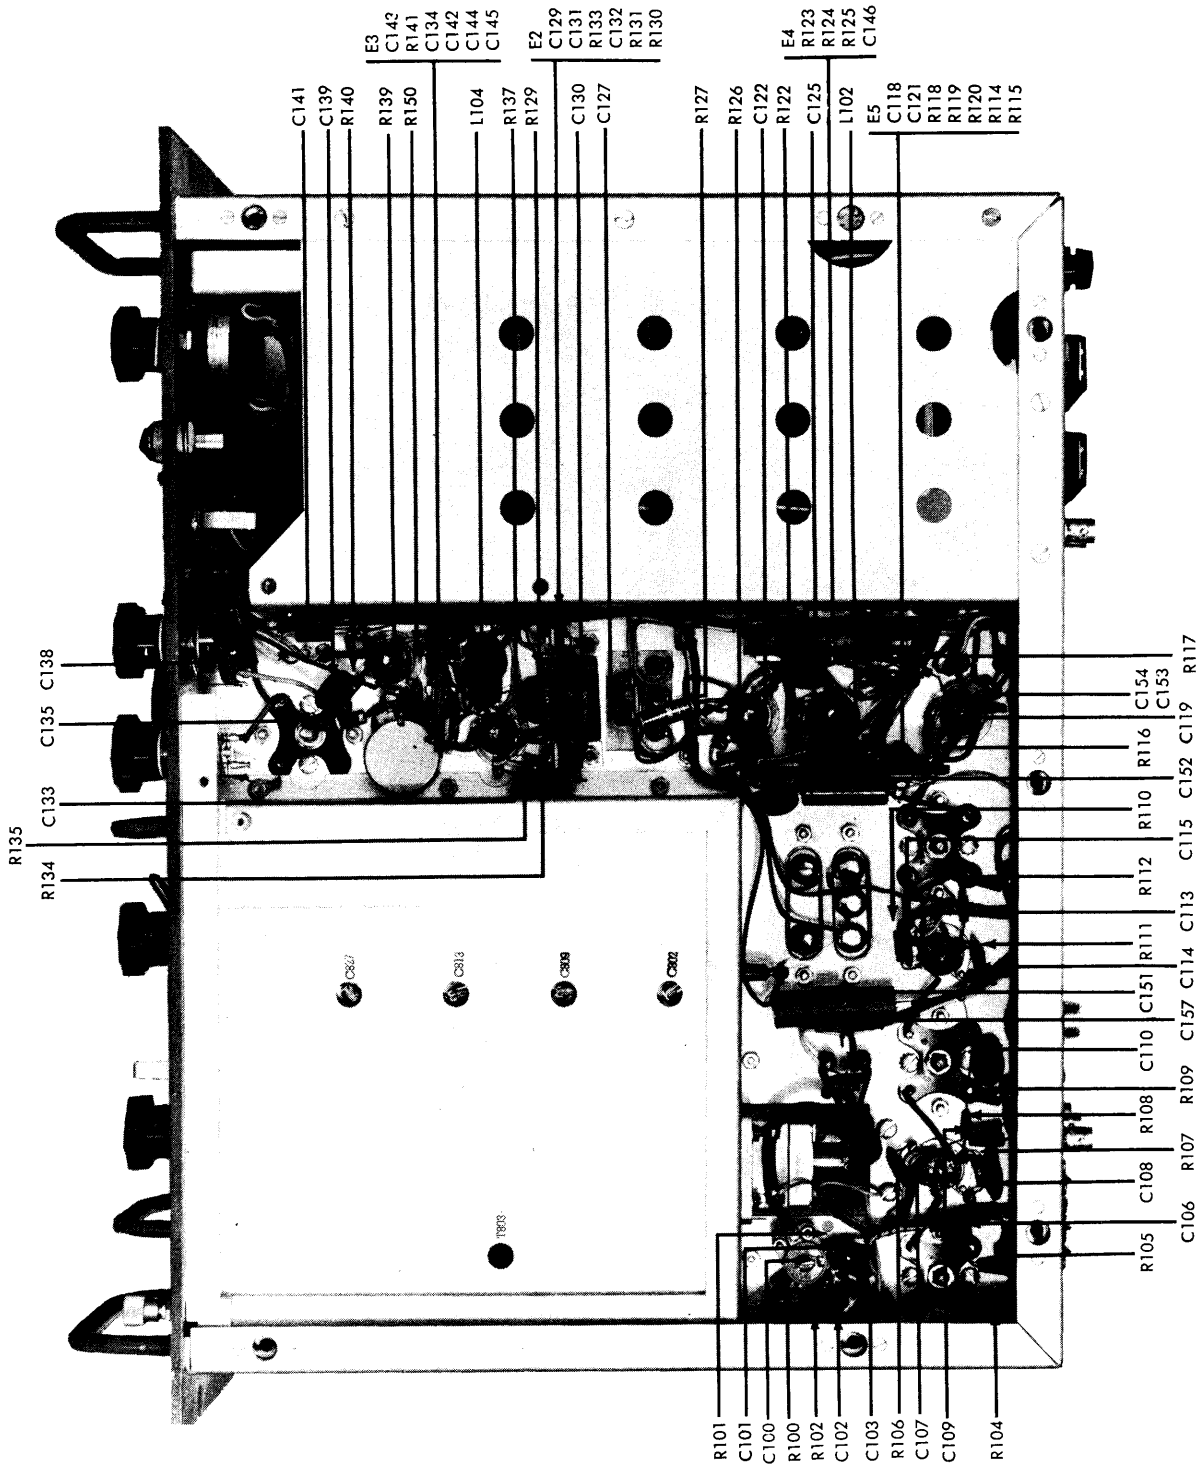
Bottom View (plate removed), R-5007/FRR-502
